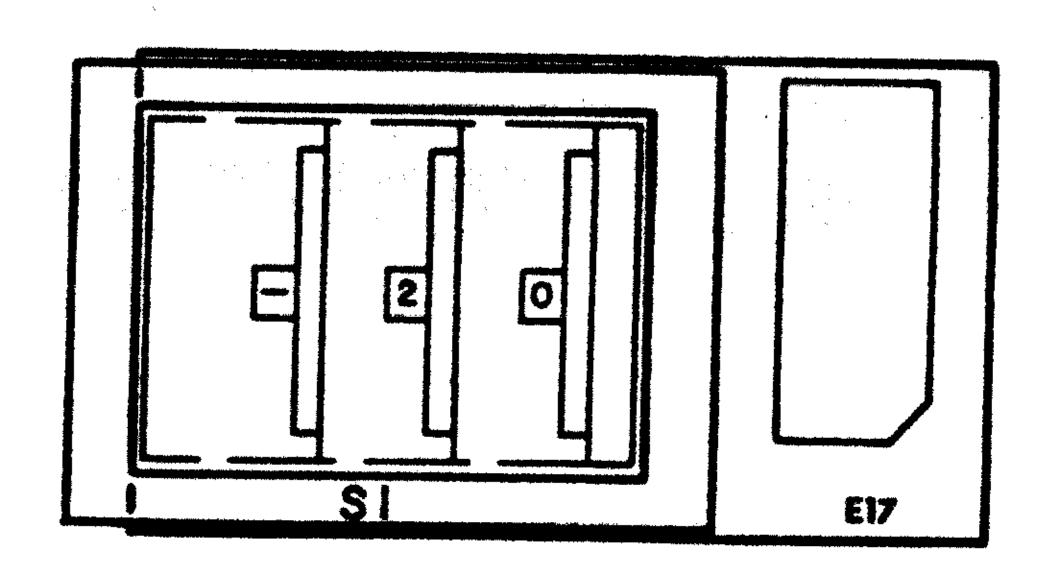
Type 791827 BFO Switch (A9), Location of Components
